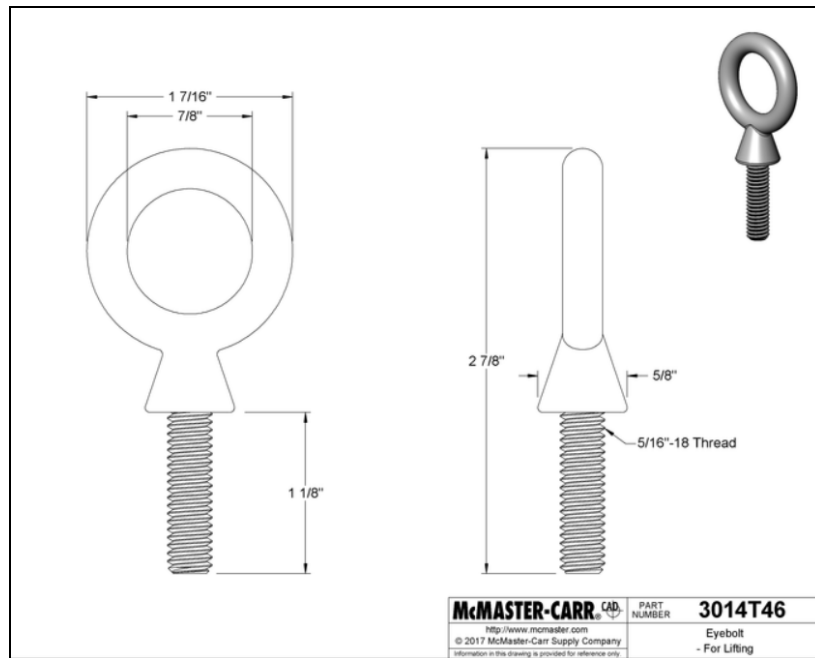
detailed drawing of the Eye bolt from McMaster Carr
